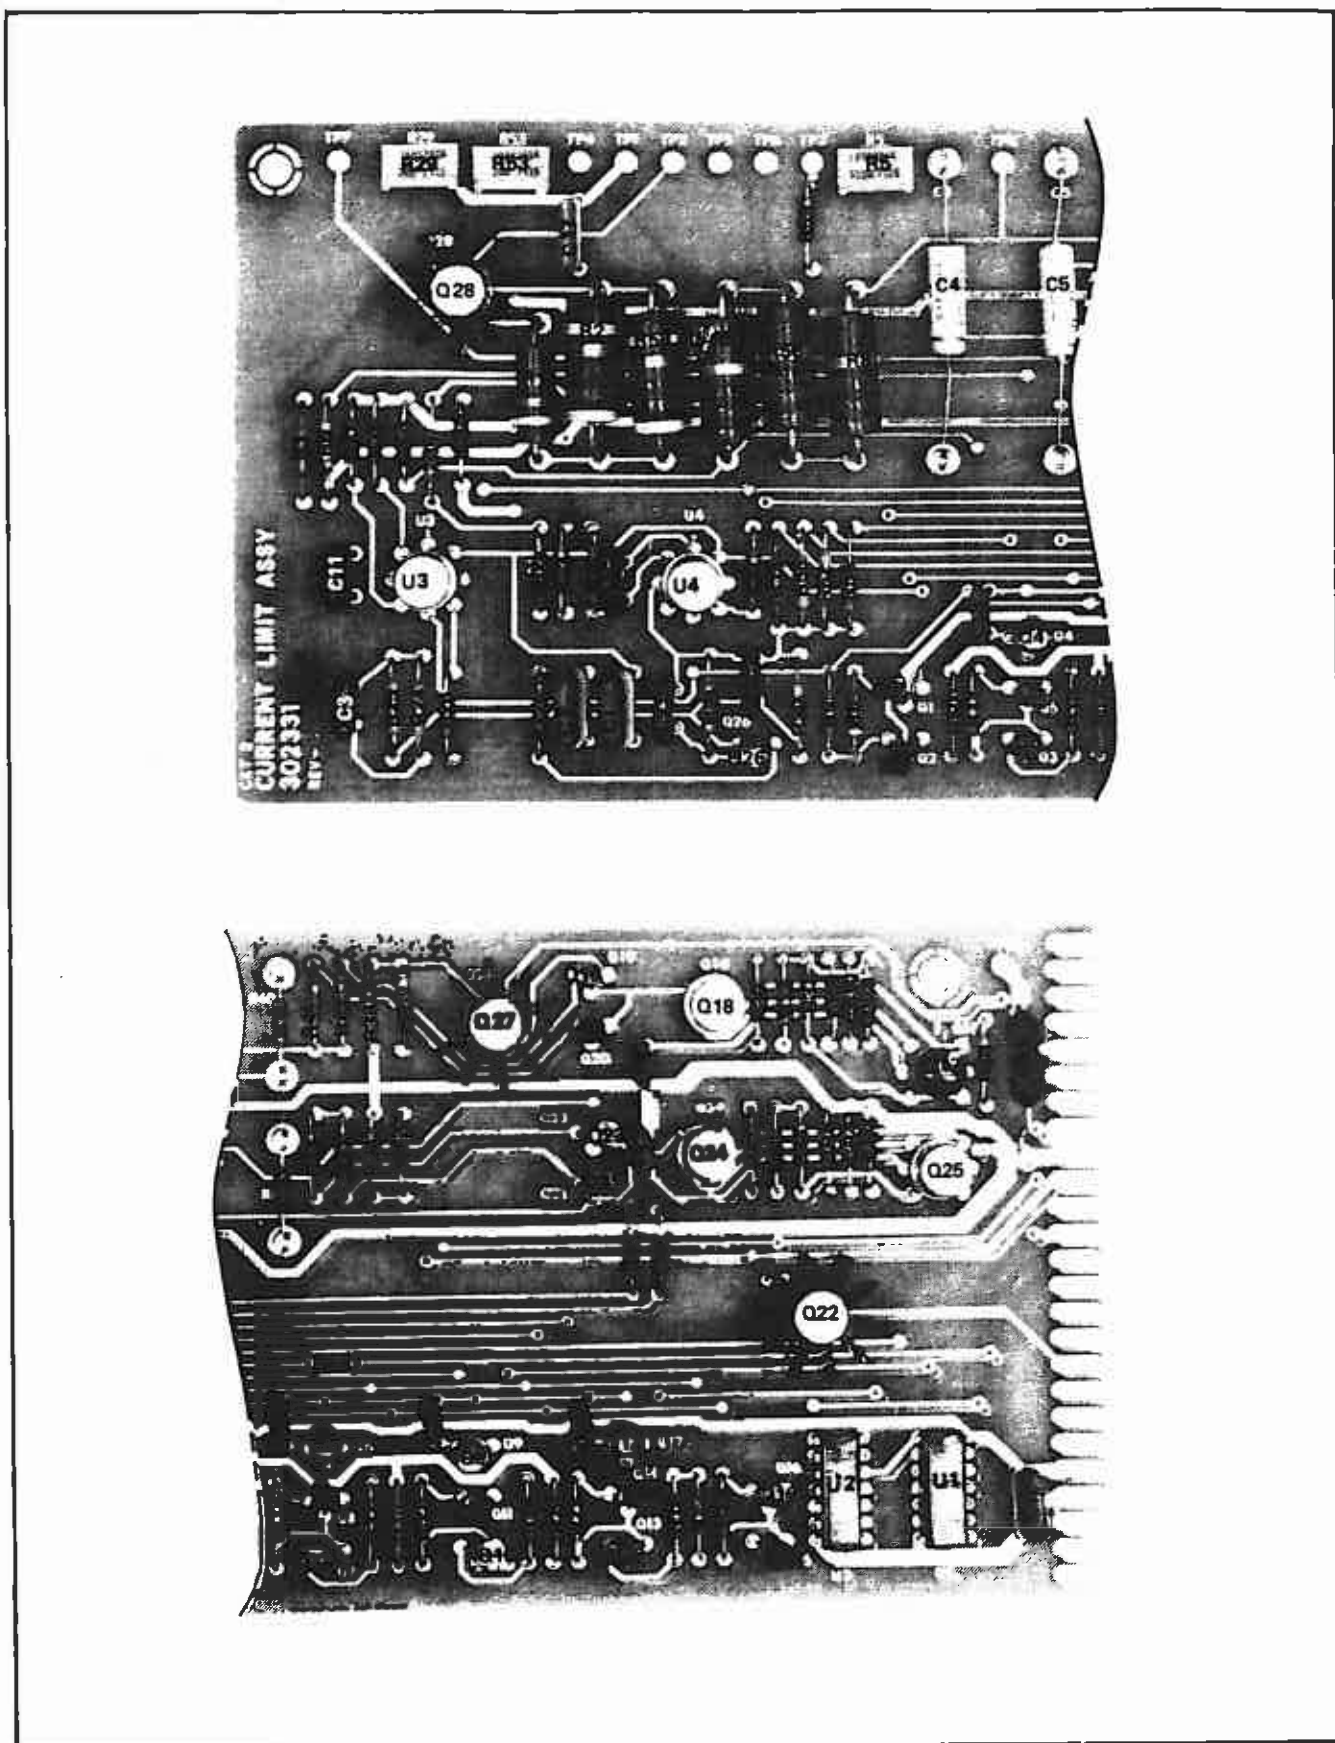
CURRENT LIMIT PCB ASSEMBLY (-06 OPTION)
